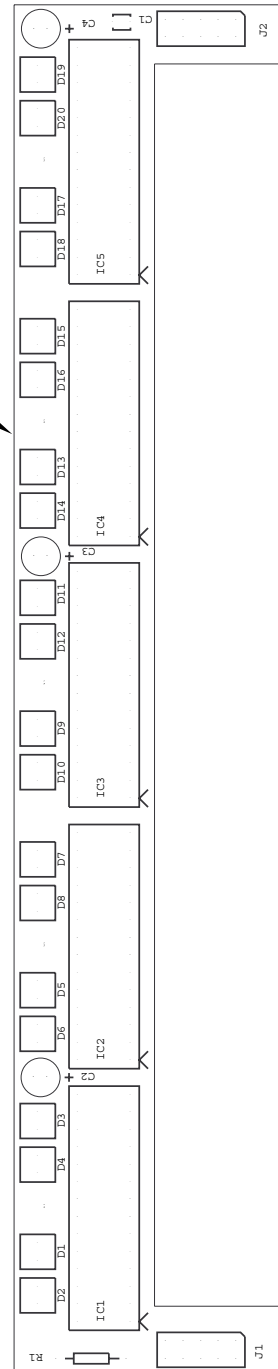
Assembly Drawing—ICS-92/92T Display PCB Rev. A
